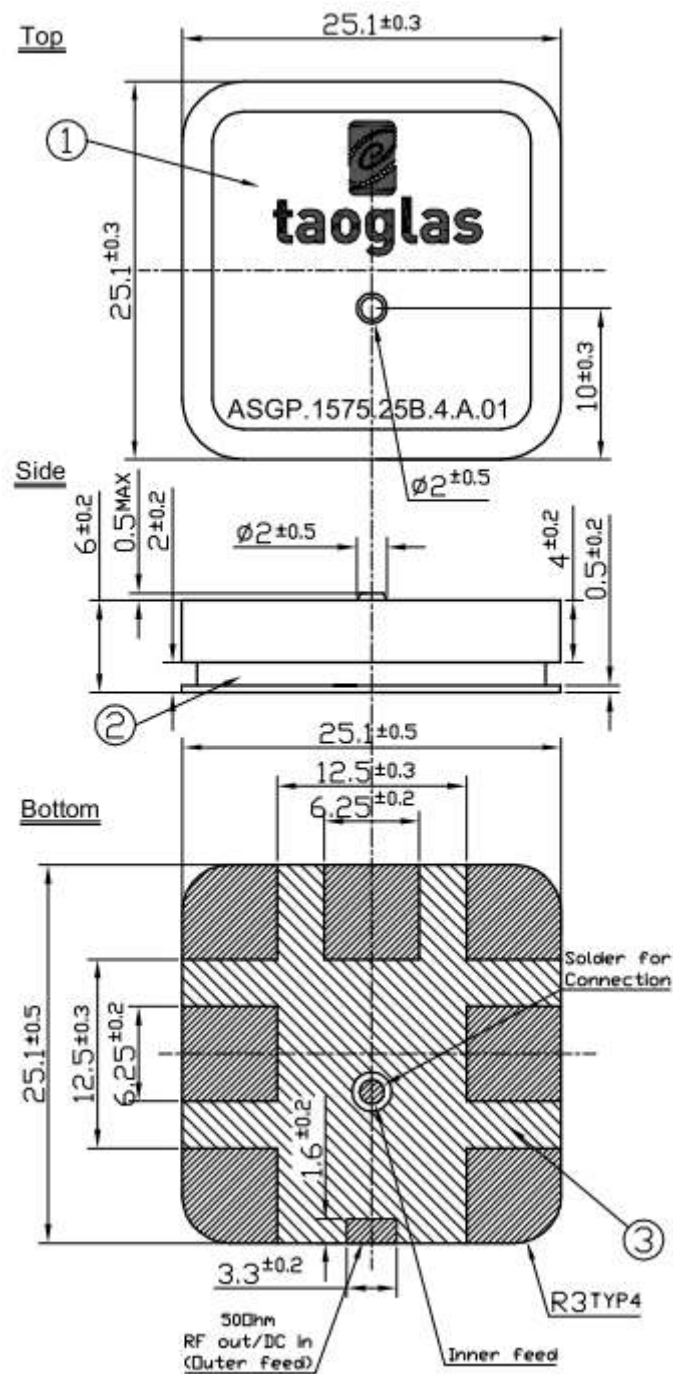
Mechanical Drawing of the ASGP.1575.25B.4.A.01 Active GPS Antenna
